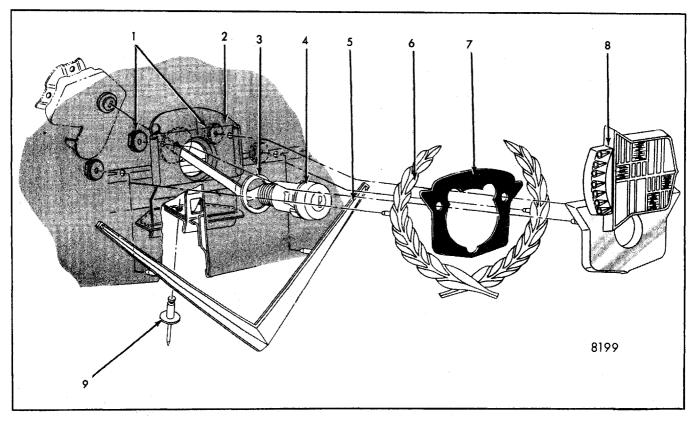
Cadillac Rear Compartment Swivel Emblem and Lock Cylinder - All Styles less K
